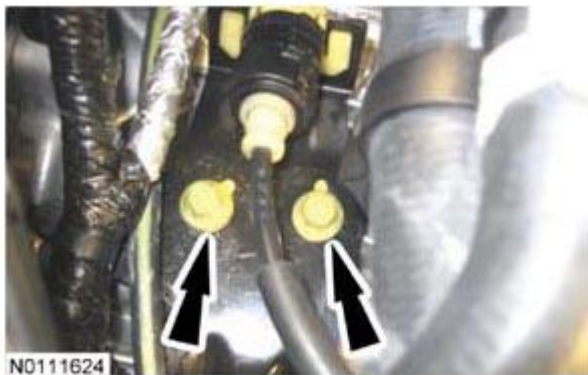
Locating Selector Lever Cable Bracket Bolts
